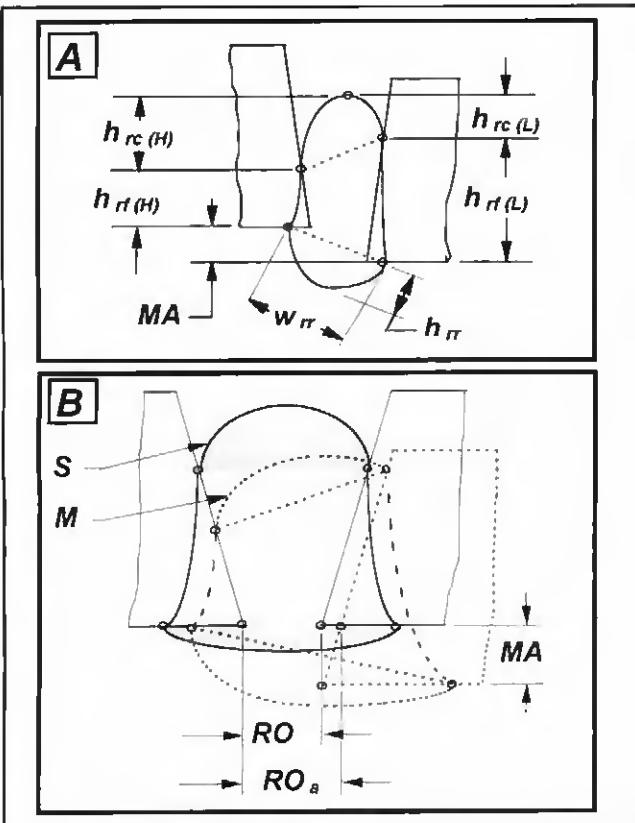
Characteristic areas and dimensions of the root weld at plate misalignment.
